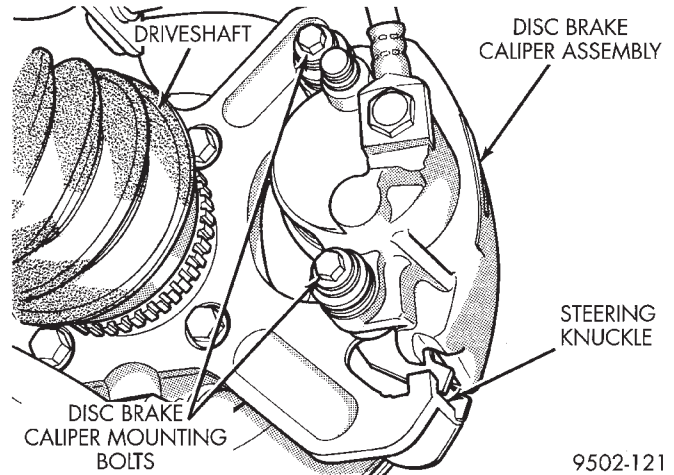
Front Disc Brake Caliper Attaching Bolts
